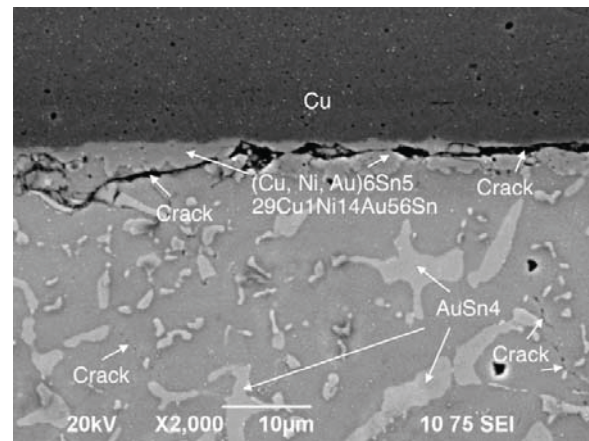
Fracture in bulk solder joint and IMC near component side, a QFN on a thick Au board, as-built.
